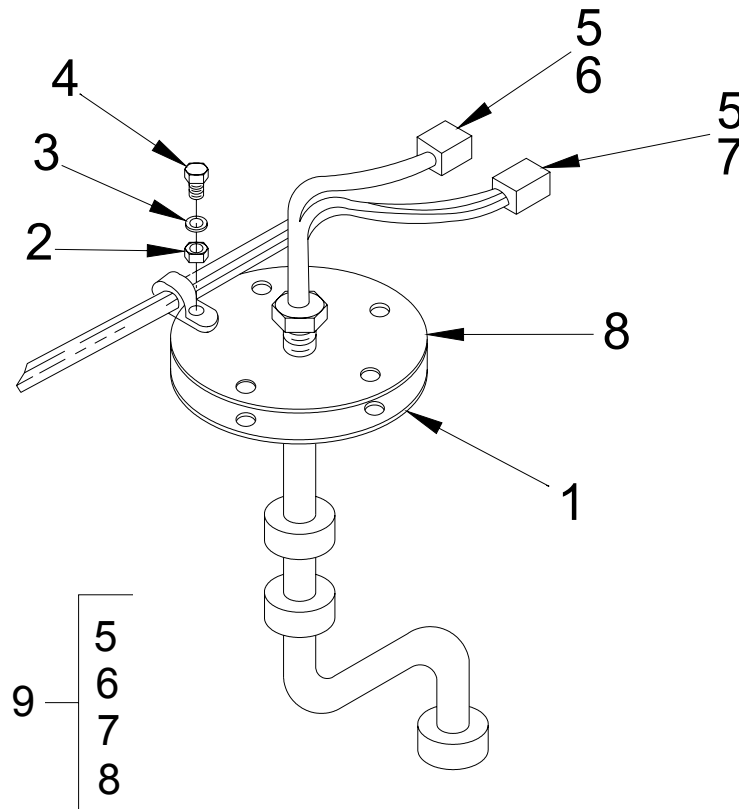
FUEL SYSTEM ASSEMBLY/FUEL TANK/FUEL-LEVEL SWITCH
